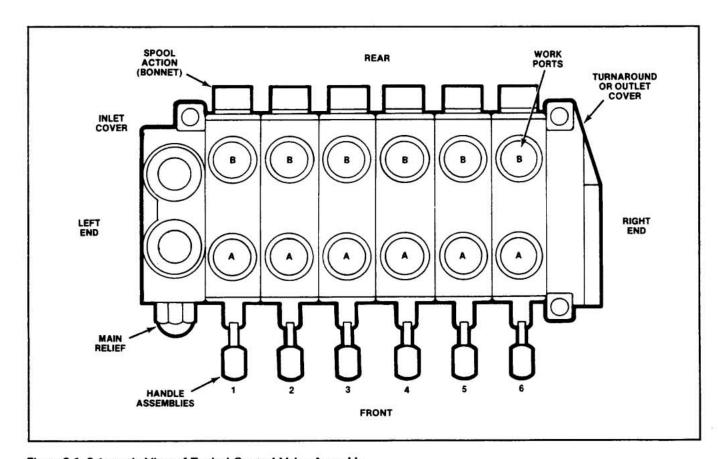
Schematic-View of Typical Control Valve Assembly.
